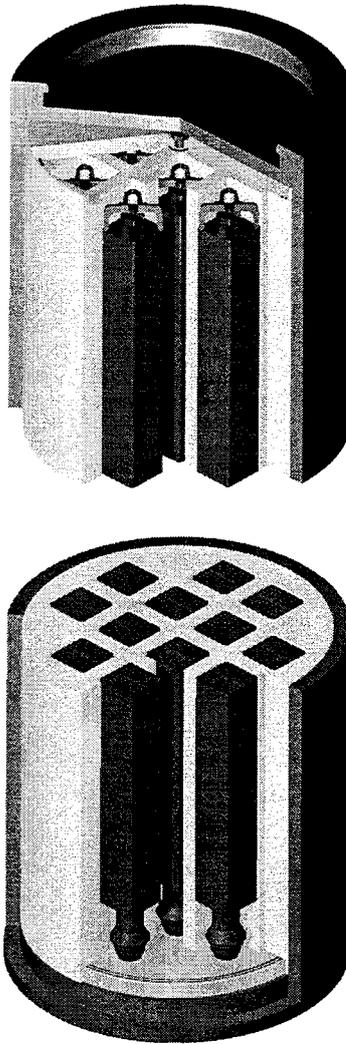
Exploded drawing of canister for spent nuclear fuel. Version for 12 BWR elements.
